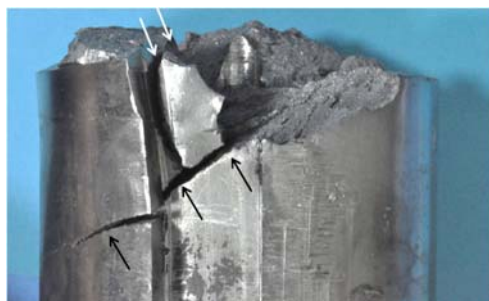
This image was extracted from the metallurgy analysis of the ~4” solid steel drive shaft that was sheared in the shutter drive unit that failed in April 2012. This is an indication of the enormous forces at work in the drive system, and the “industrial grade” magnitude of the job to repair it.
